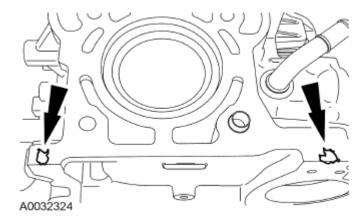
Locating Silicone Gasket And Sealant Apply Locations Courtesy of FORD MOTOR CO.
